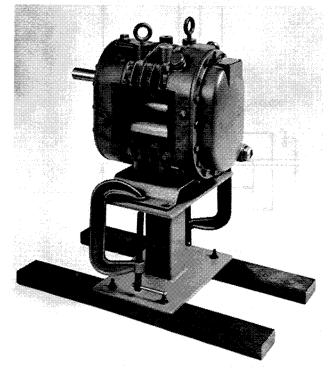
BLOWER SECURED TO WORK STAND WITH "C" CLAMPS
